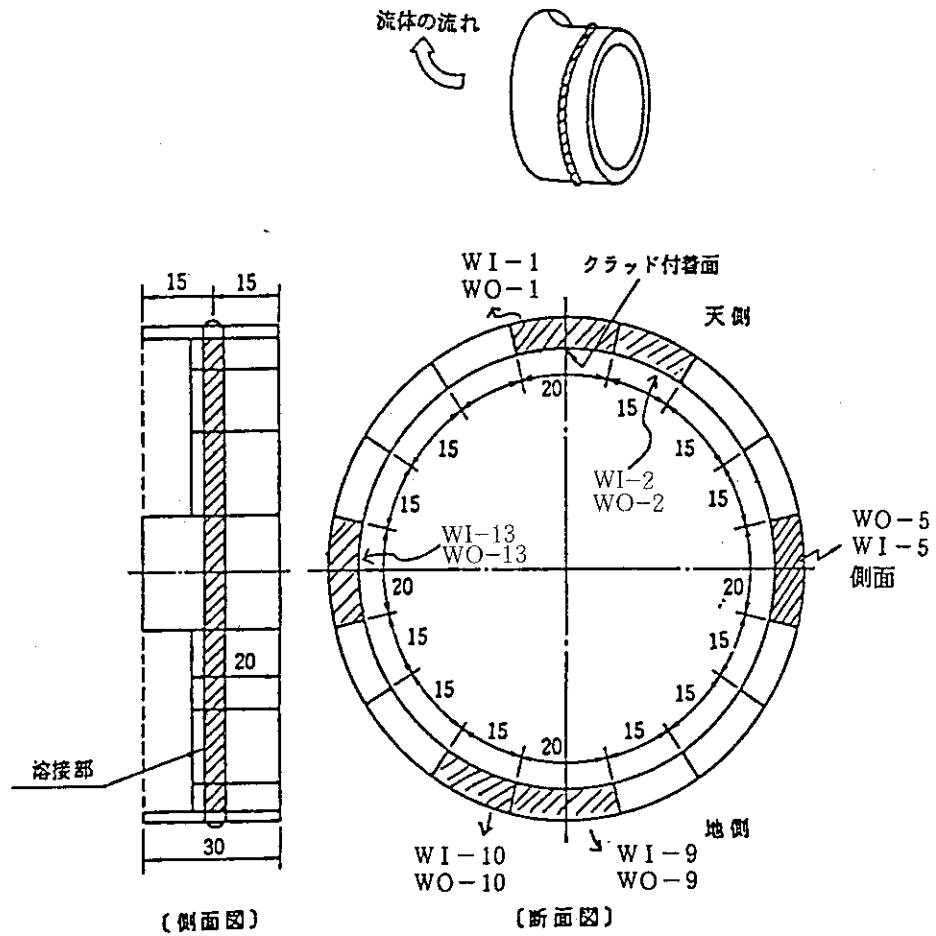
Sampling Location and Number of Specimens in OWL-2 Primary Piping (Welded Pipe)
